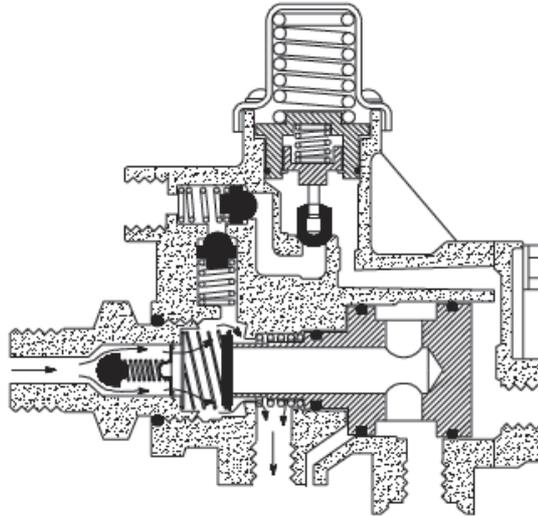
SR3 Spring Brake Control Valve – Brake System Failure
